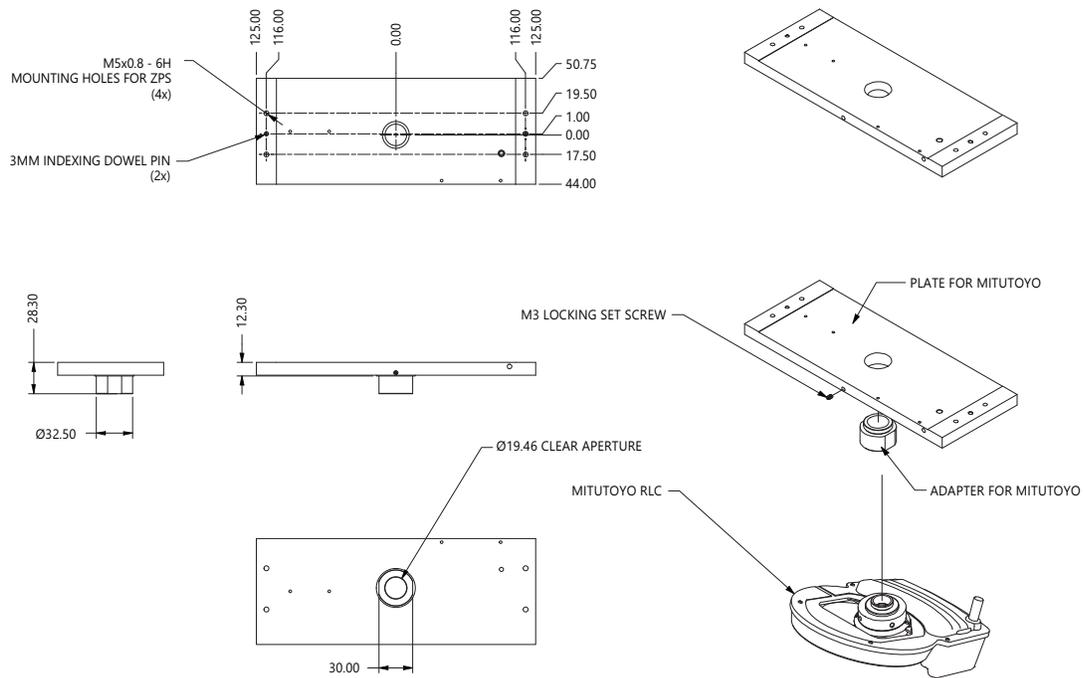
Mitutoyo Rotary Lens Changer Plate and Adapter
